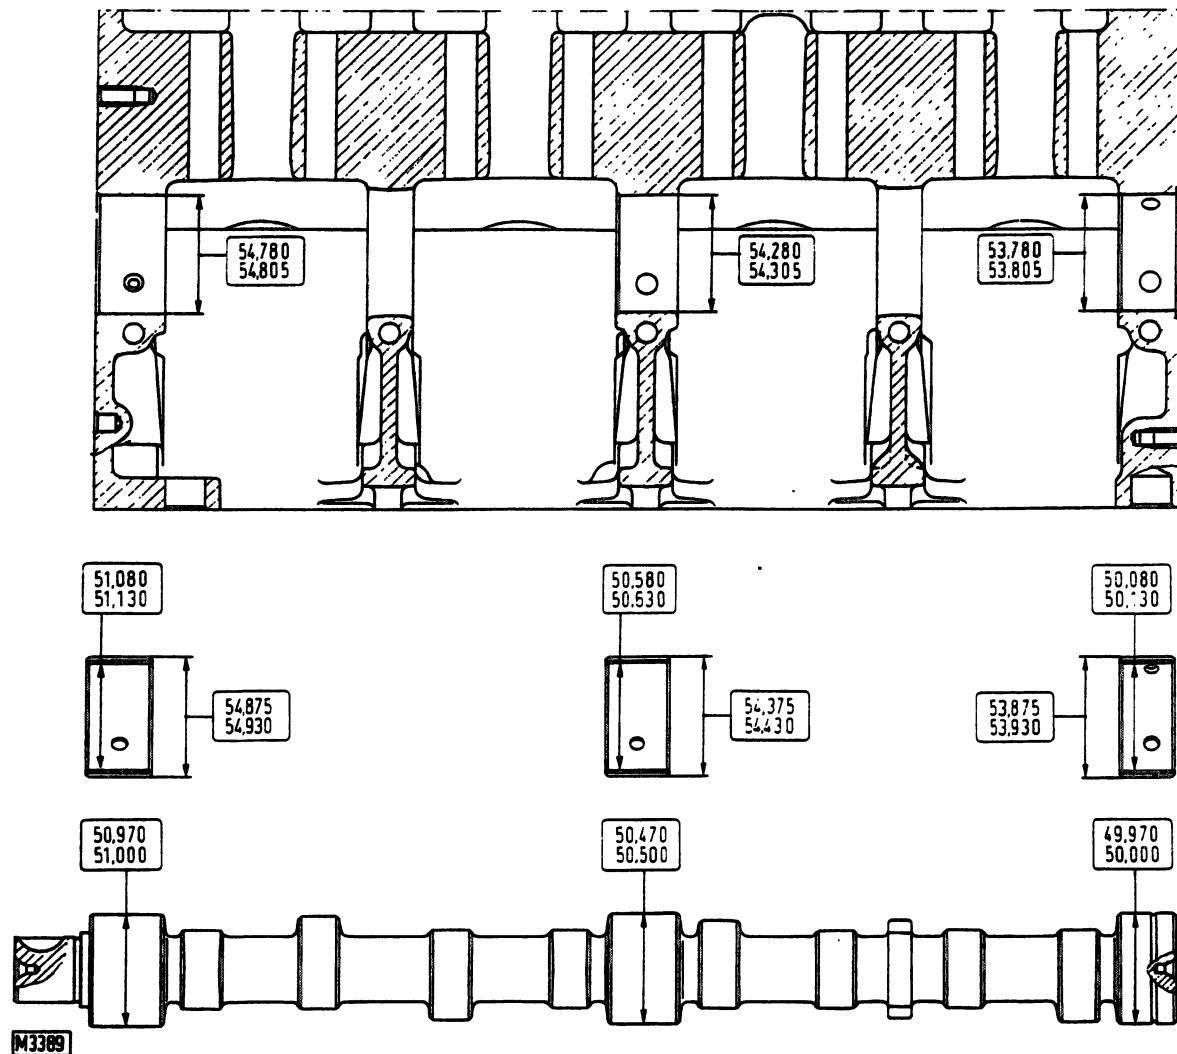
Main data of camshaft, bushings and seats in the block.
